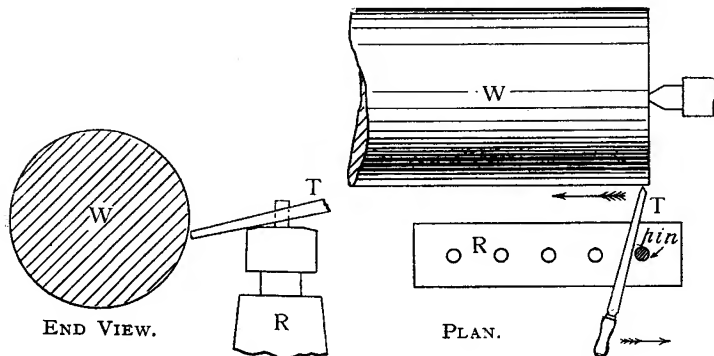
POSITION OF HAND-TOOL AND WORK.
